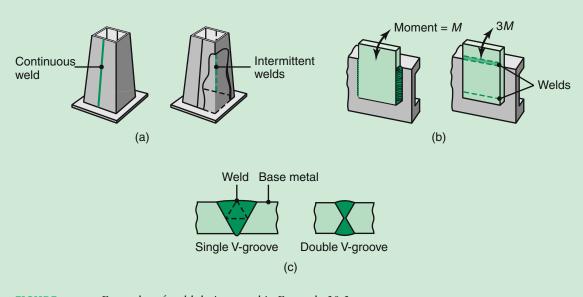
Examples of weld designs used in Example 30.3.
